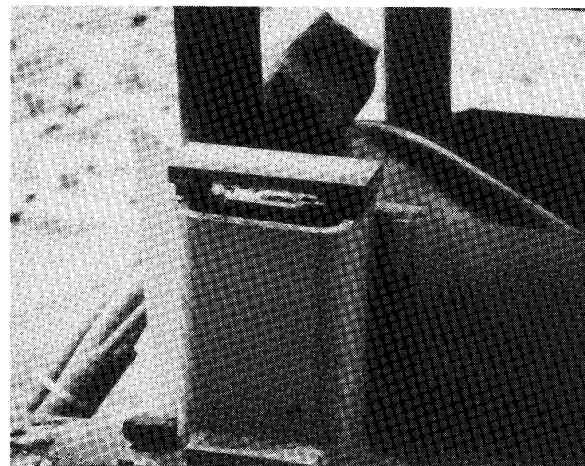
Stops welded to inner section of sliding brackets for partial-floating end cab to prevent downward movement.
